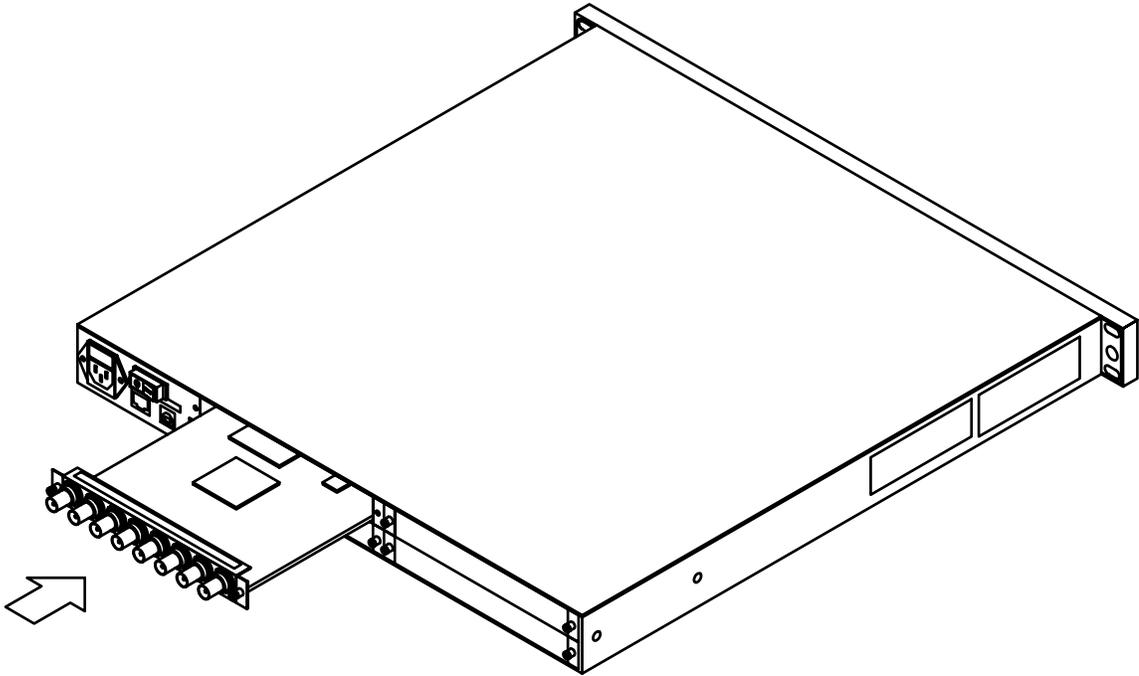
FRM-501 INTEGRITY SYSTEM FRAME CARD LOADING
